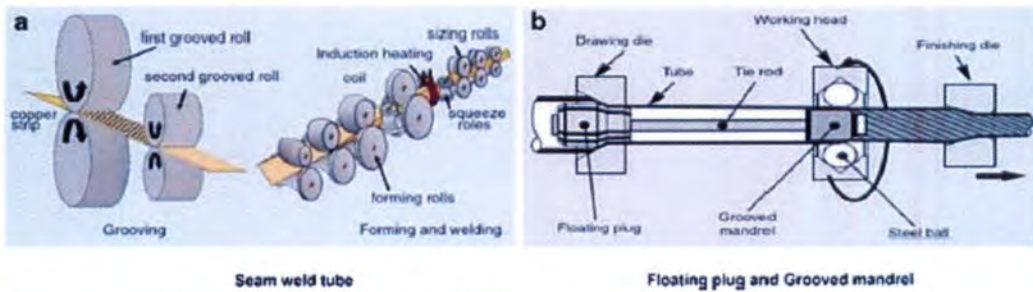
The conventional method of inner spiral ribbed tube drawing [1]
